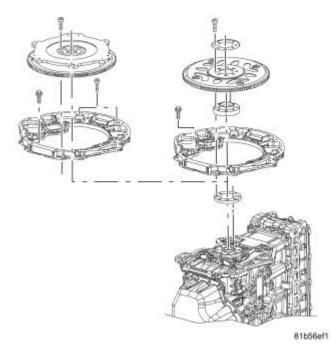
Flywheel & Flex Plate Courtesy of CHRYSLER LLC
